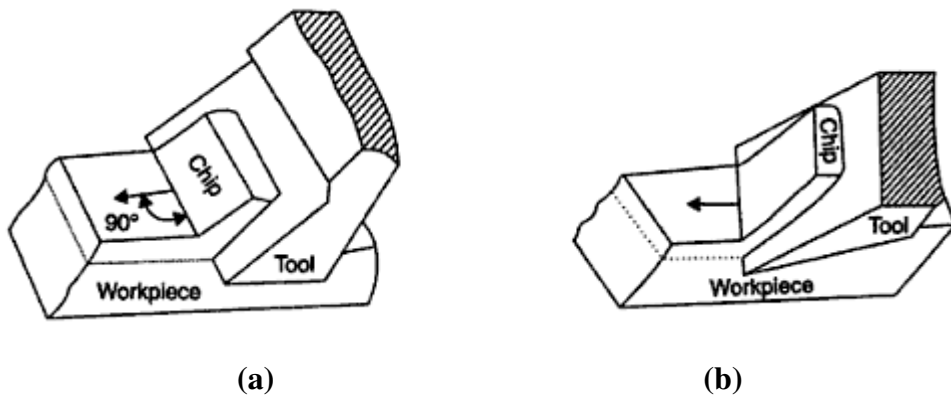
(a) Orthogonal Machining (b) Oblique Machining [Rajput (2007)].
